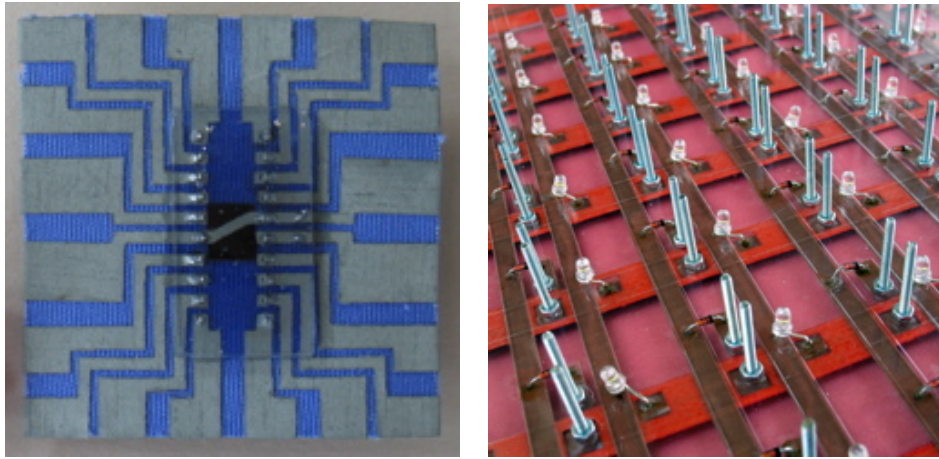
Left: solder joints are protected with an encapsulation of epoxy resin. Right: A non-fabric iron-on PCB
